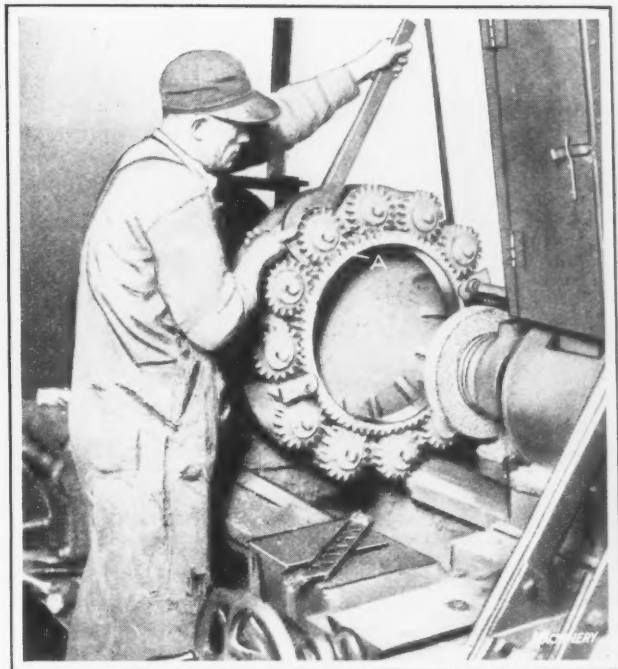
Chucking Arrangement used in grinding the Internal Surface of a Bull Gear
